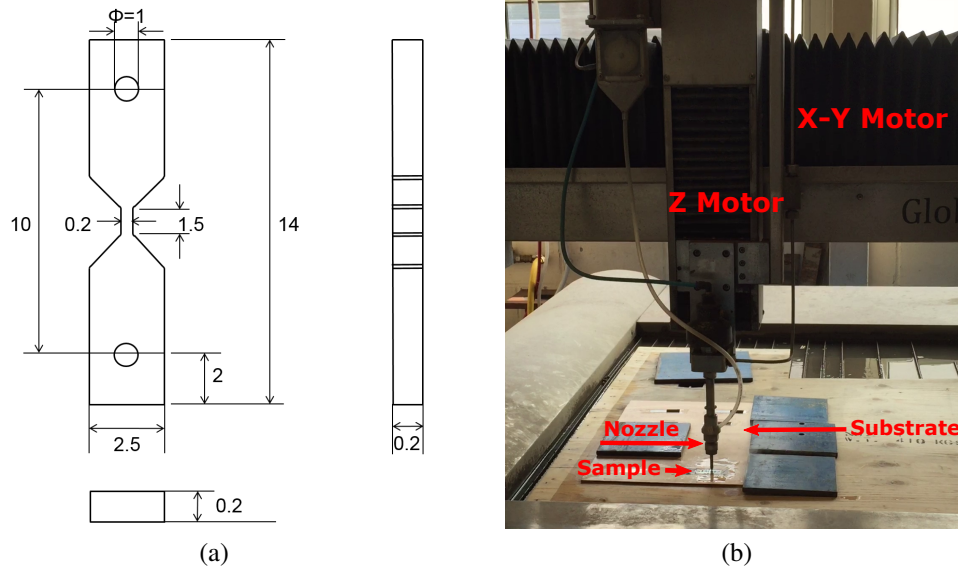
(a) Dimensions of the specimen for in-situ micro-mechanical testing with X-ray diffraction contrast tomography. (b) A waterjet cutter was used to machine the specimens.
